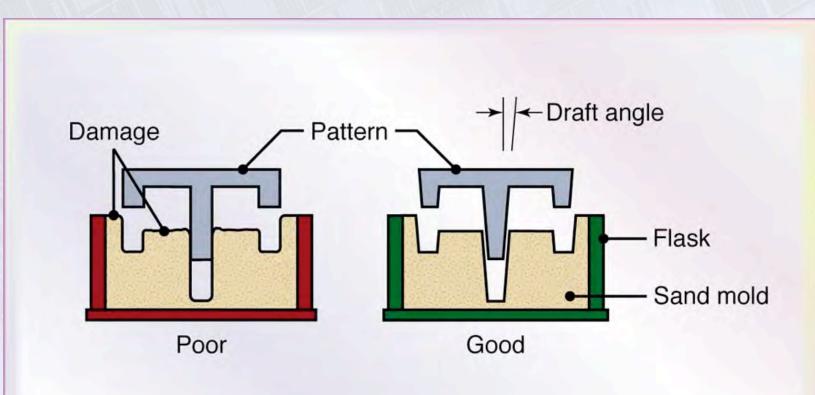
Taper on patterns for ease of removal from the sand mold
